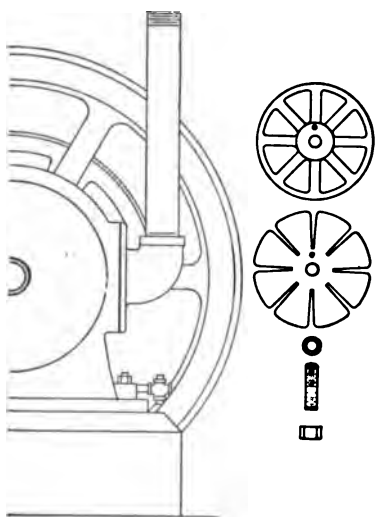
Air suction valve, F. M. & Co. horizontal oil engine.
